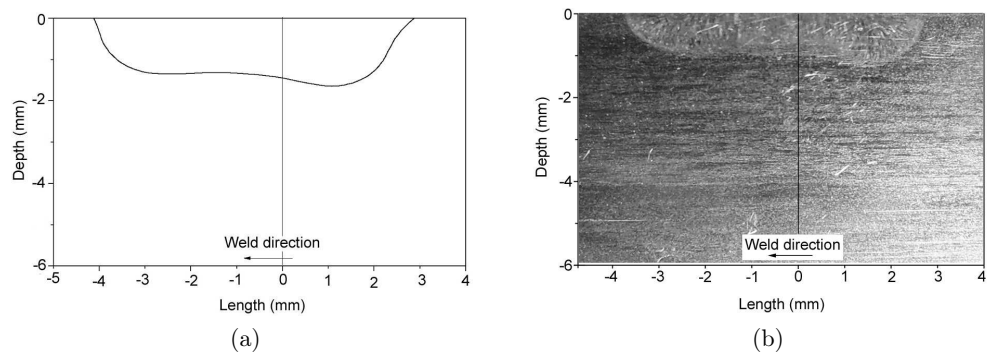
Weld pool depth for 70° torch (a) Numerical (b) Experimental
